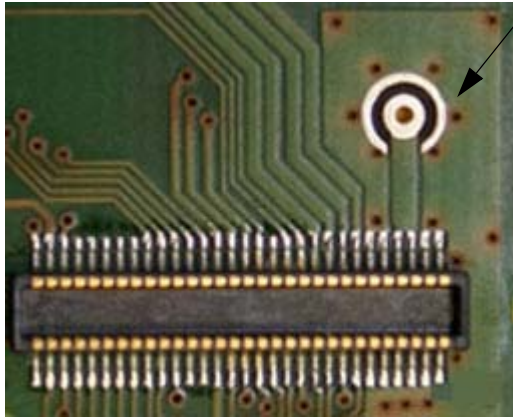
RF-Line PCB routing example for 1.0mm FR4
